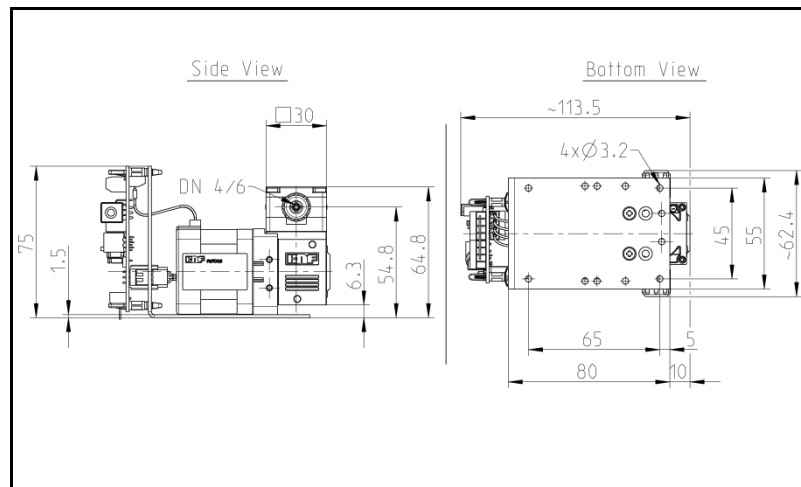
Mounting dimensions FEM 1.09\_.55 RC
